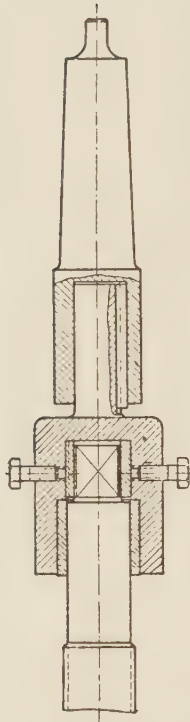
SPECIAL CHUCKING DEVICE FOR HOLDING TAPS
